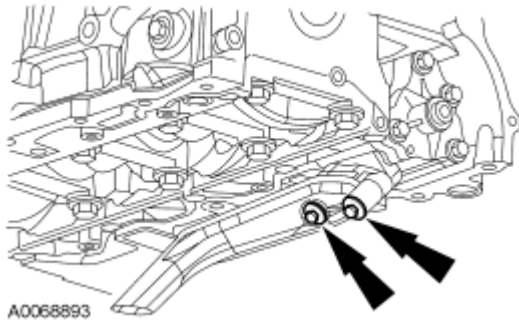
Locating Oil Pump Pickup Tube Bolts
